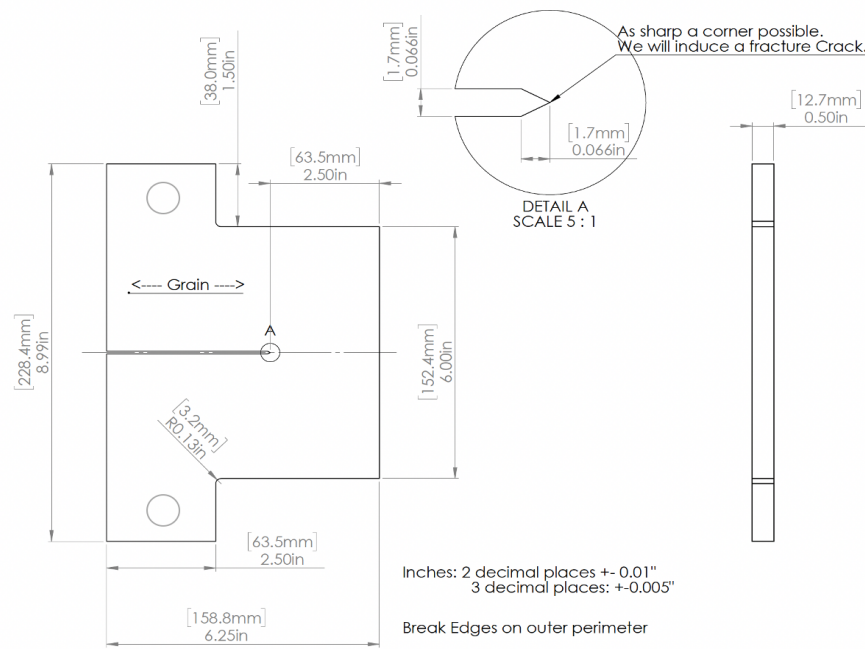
Finalized CT specimen geometry used to build the actual specimen.
